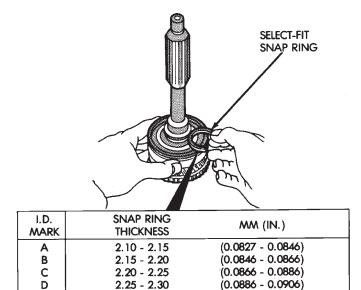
Select Input Shaft Bearing Snap-ring DISASSEMBLY
